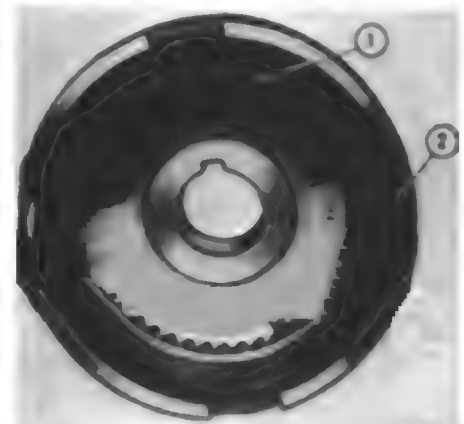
On direct drive side of TA clutch, press inward on back plate (1) and remove snap ring (2).
